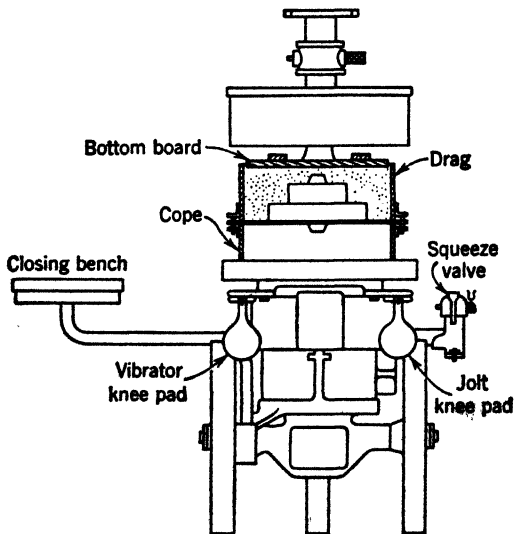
B. Position of mold on machine when jolting the drag. (Reproduced from print belonging to Osborn Manufacturing Co., Cleveland, Ohio.)
